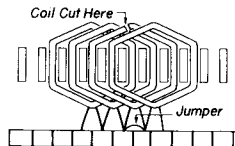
Cutting out a shorted coil on a four-pole wave winding.
